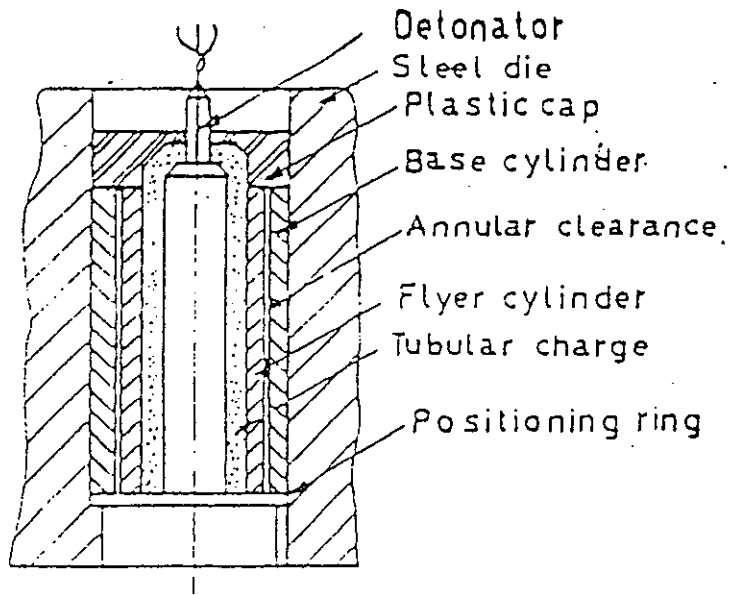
Explosive welding system after Ref.[1]
